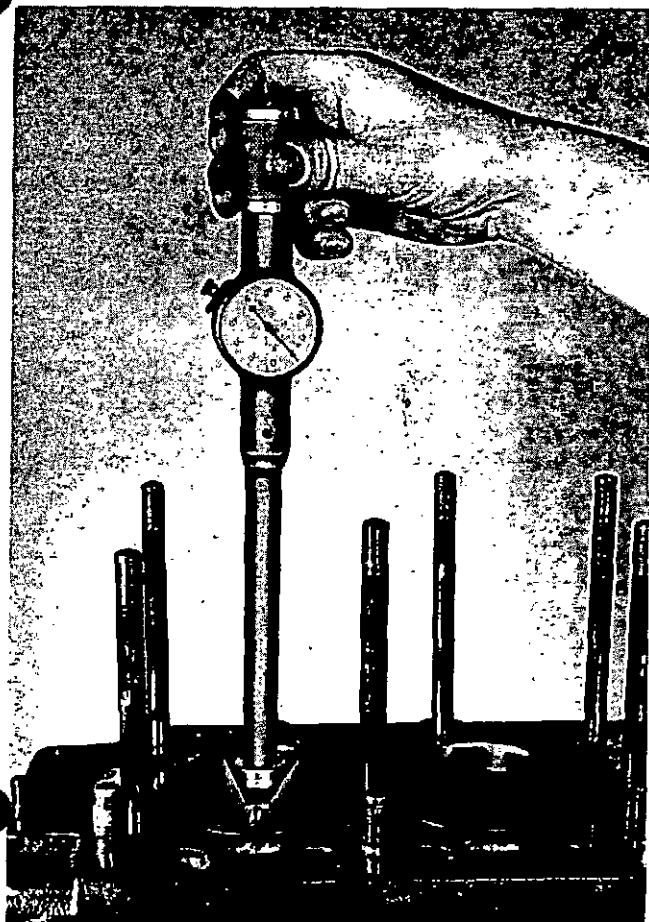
Measuring Original Diameter of Sleeve with Bore Gauge
